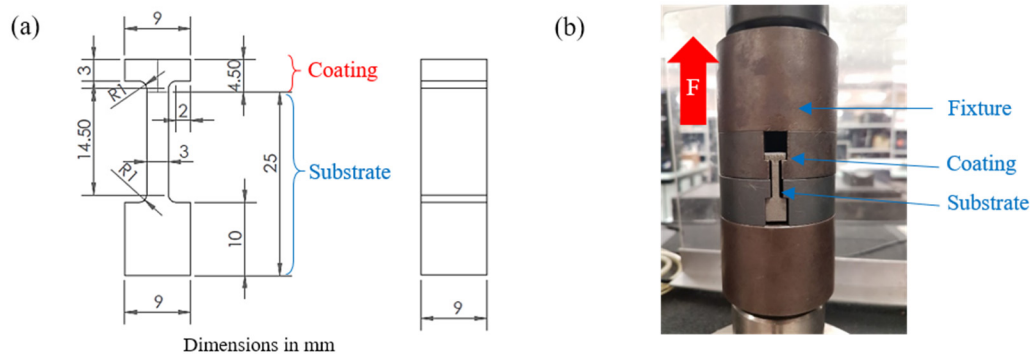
(a) Schematic drawing of sample for mini tensile test and (b) tensile test setup
